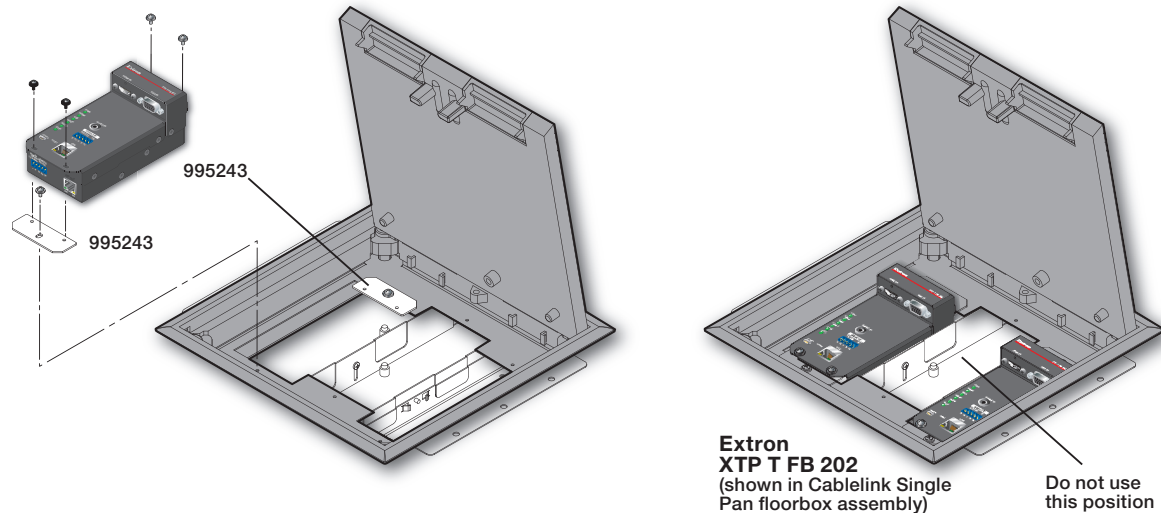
XTP T FB 202 in an MK Electric CableLink Plus Single Pan Floor Box
